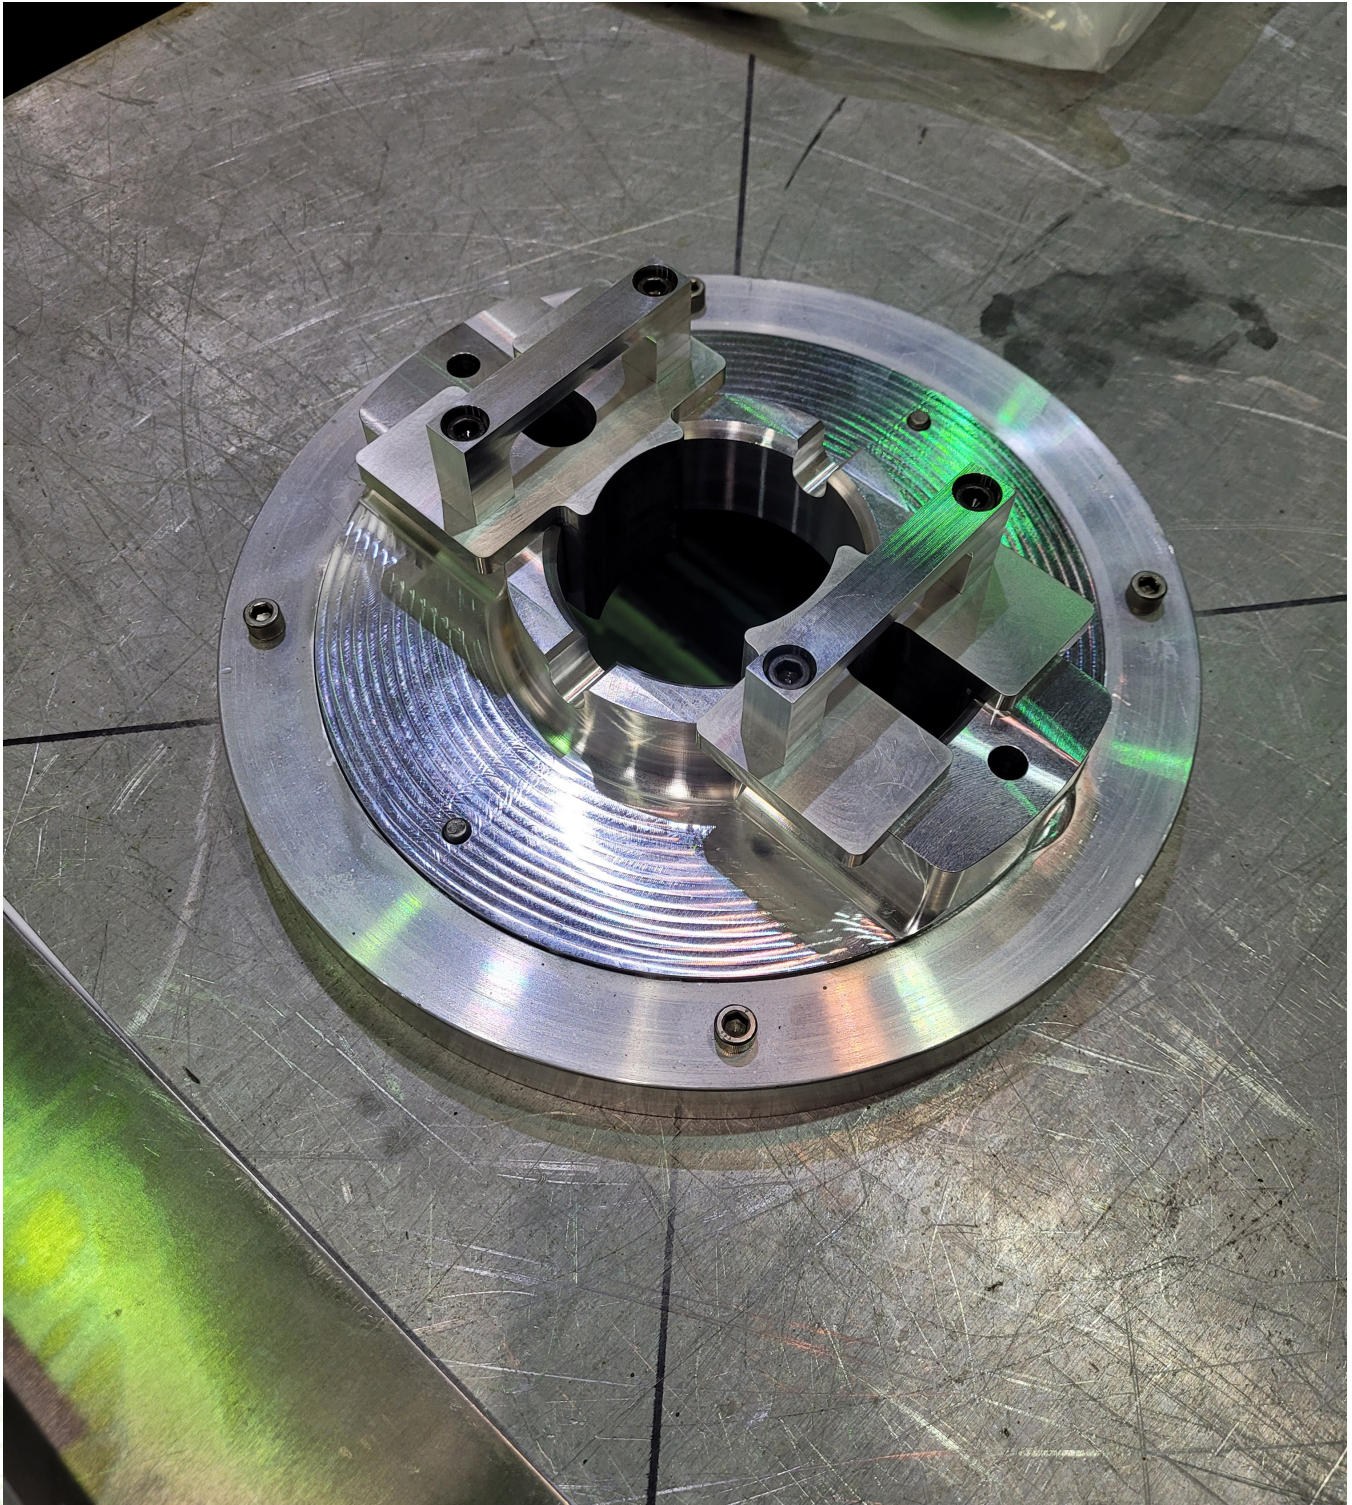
THOR 5D table insert used to hold the capsule at the 5D worktable while it is loaded and sealed
